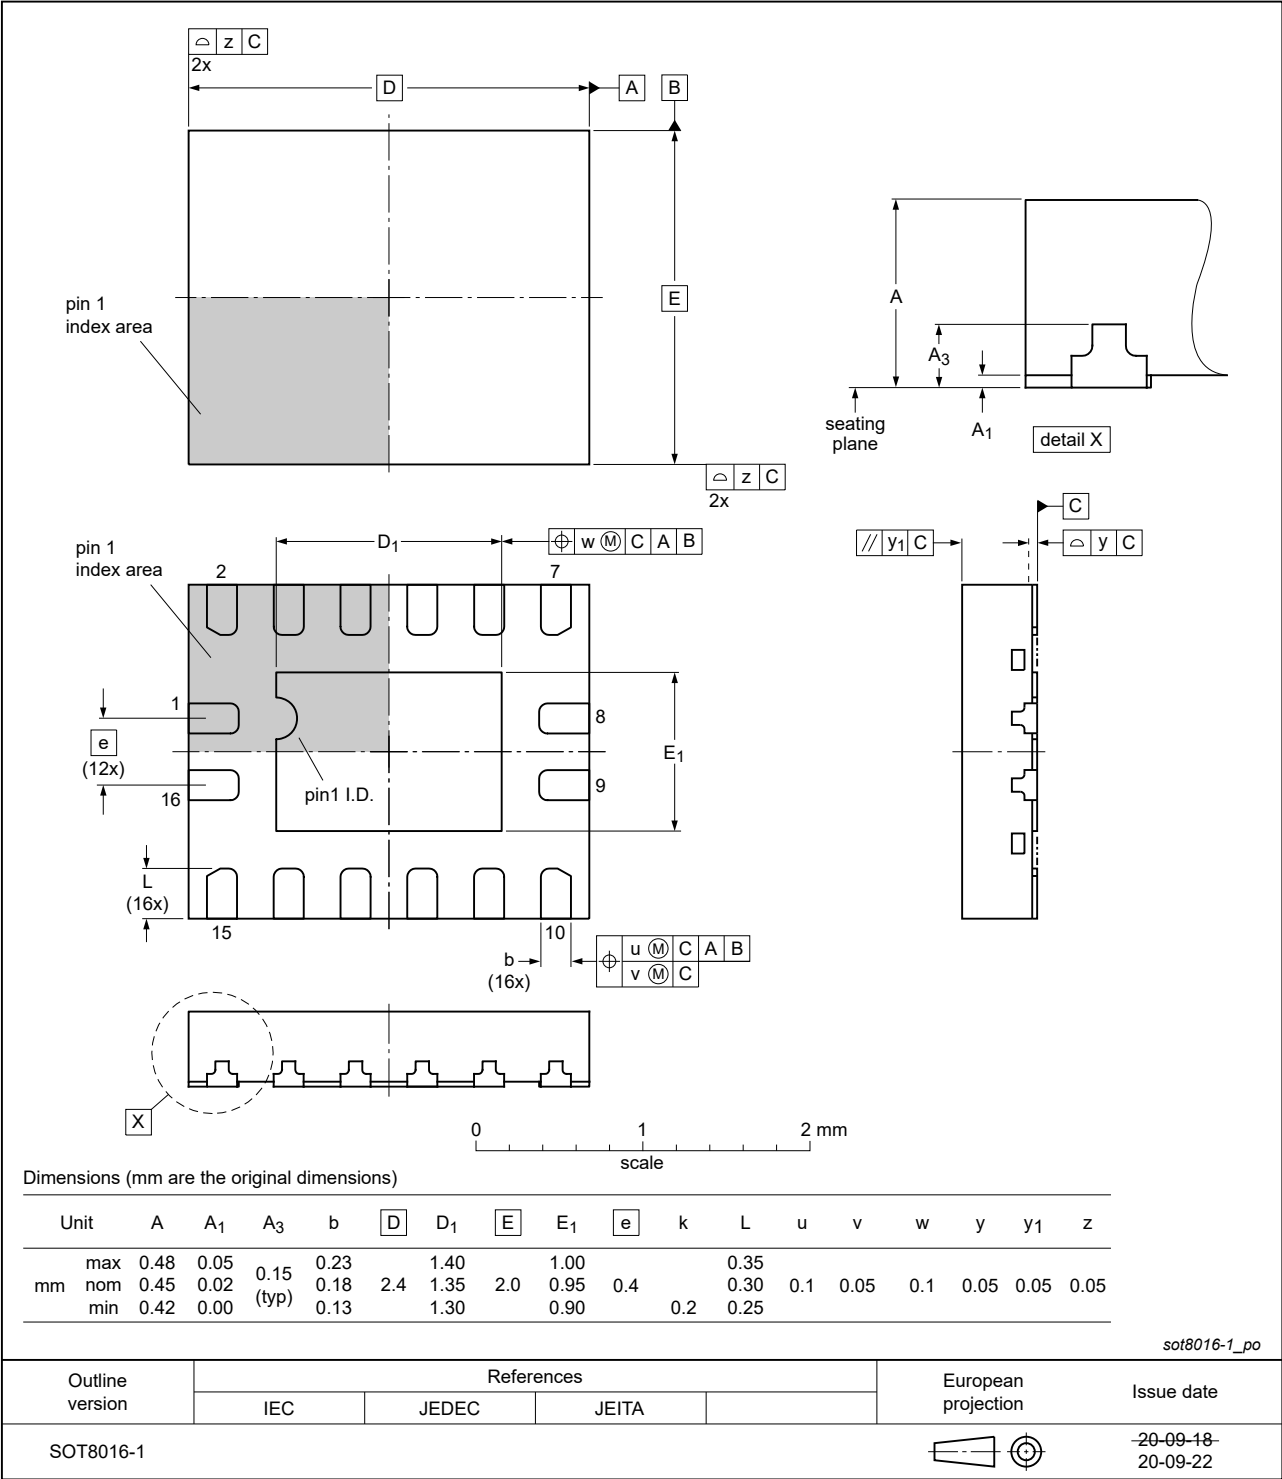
Package outline SOT8016-1 (DHXQFN16)
